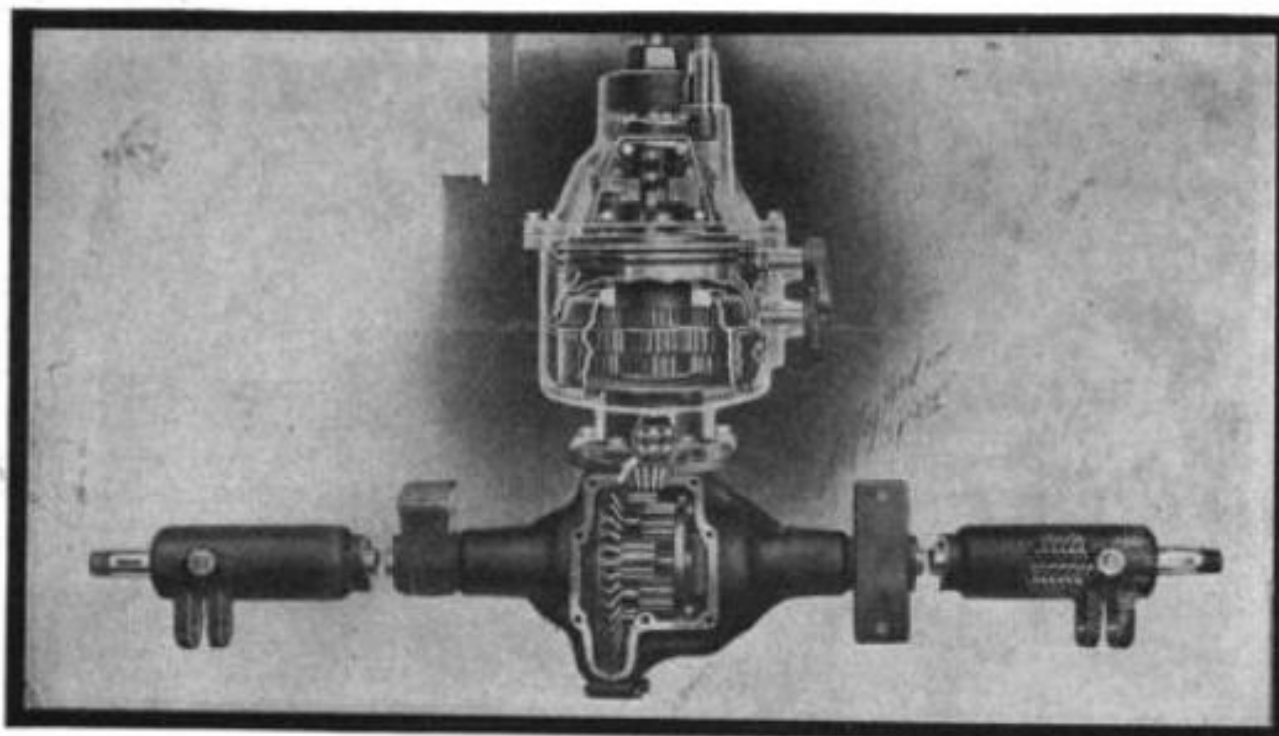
LEFEVER ARMS CO.'S PLANETARY GEARSET AND JACKSHAFT
